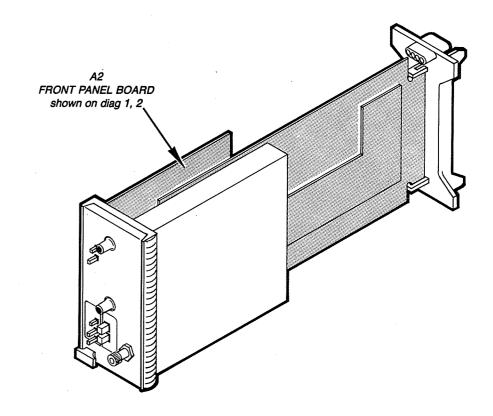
A2—Front Panel circuit board assembly (front). FRONT
